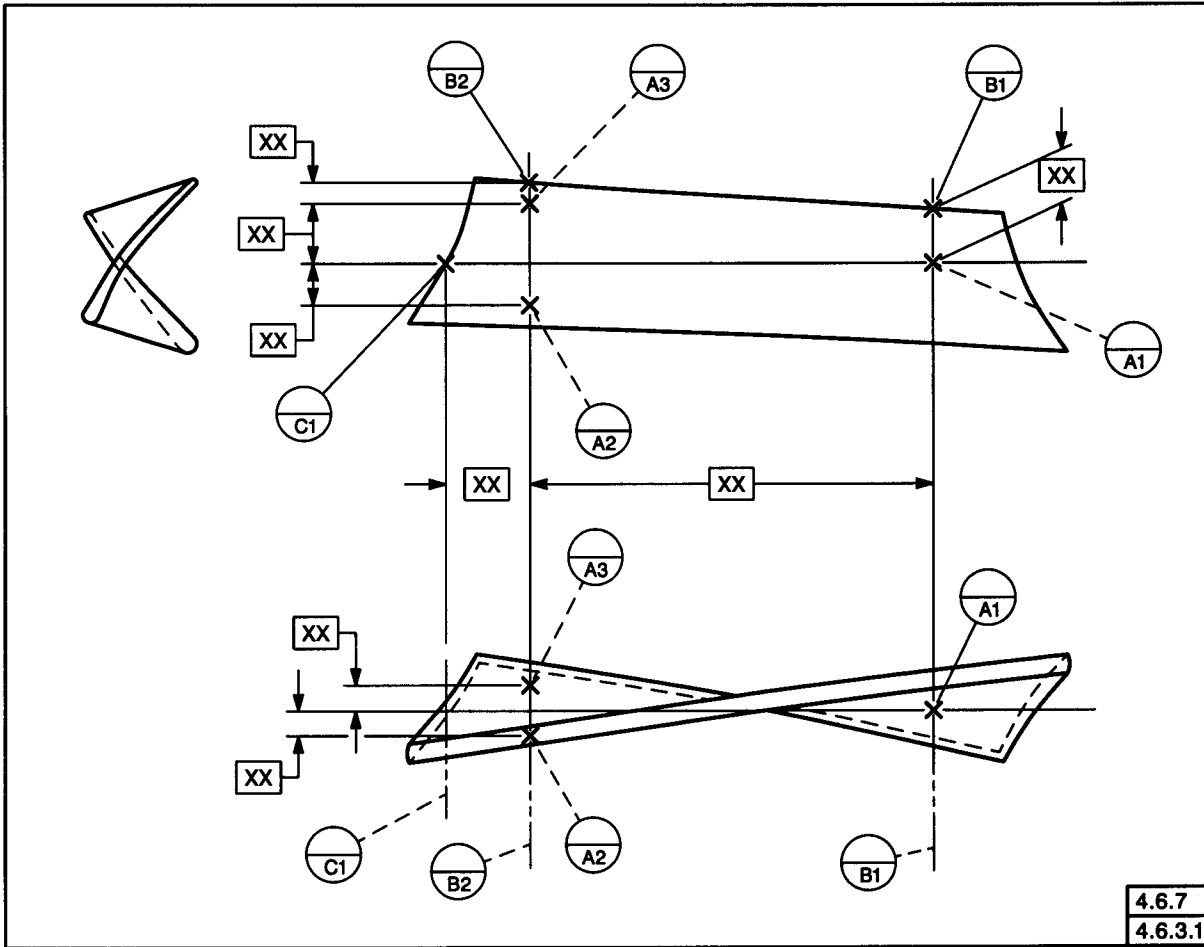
DATUM TARGETS USED TO ESTABLISH DATUM REFERENCE FRAME FOR COMPLEX PART
